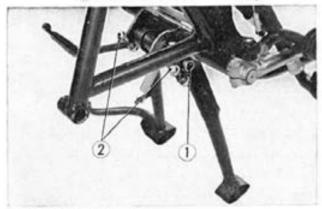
① Cotter pin ② Main stand mounting bolts
